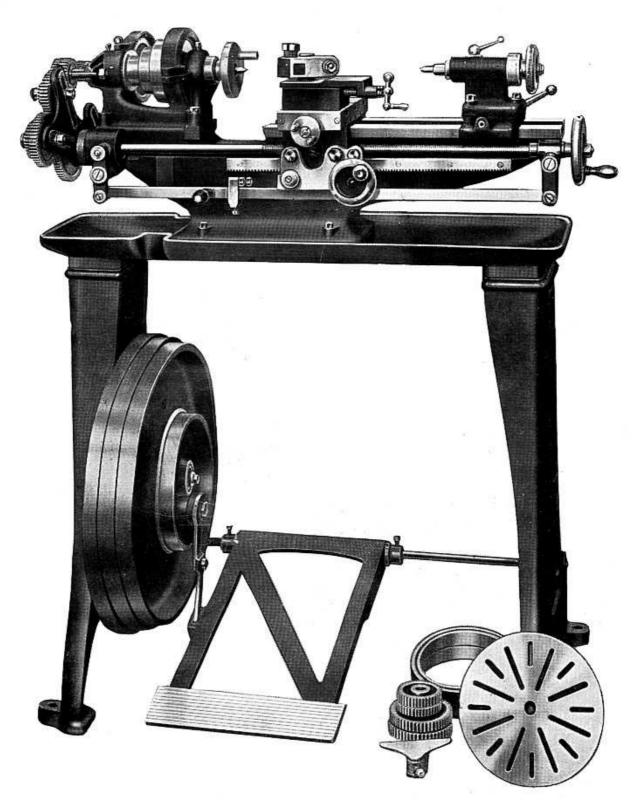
The Drummond 3½-in. Treadle Lathe.
